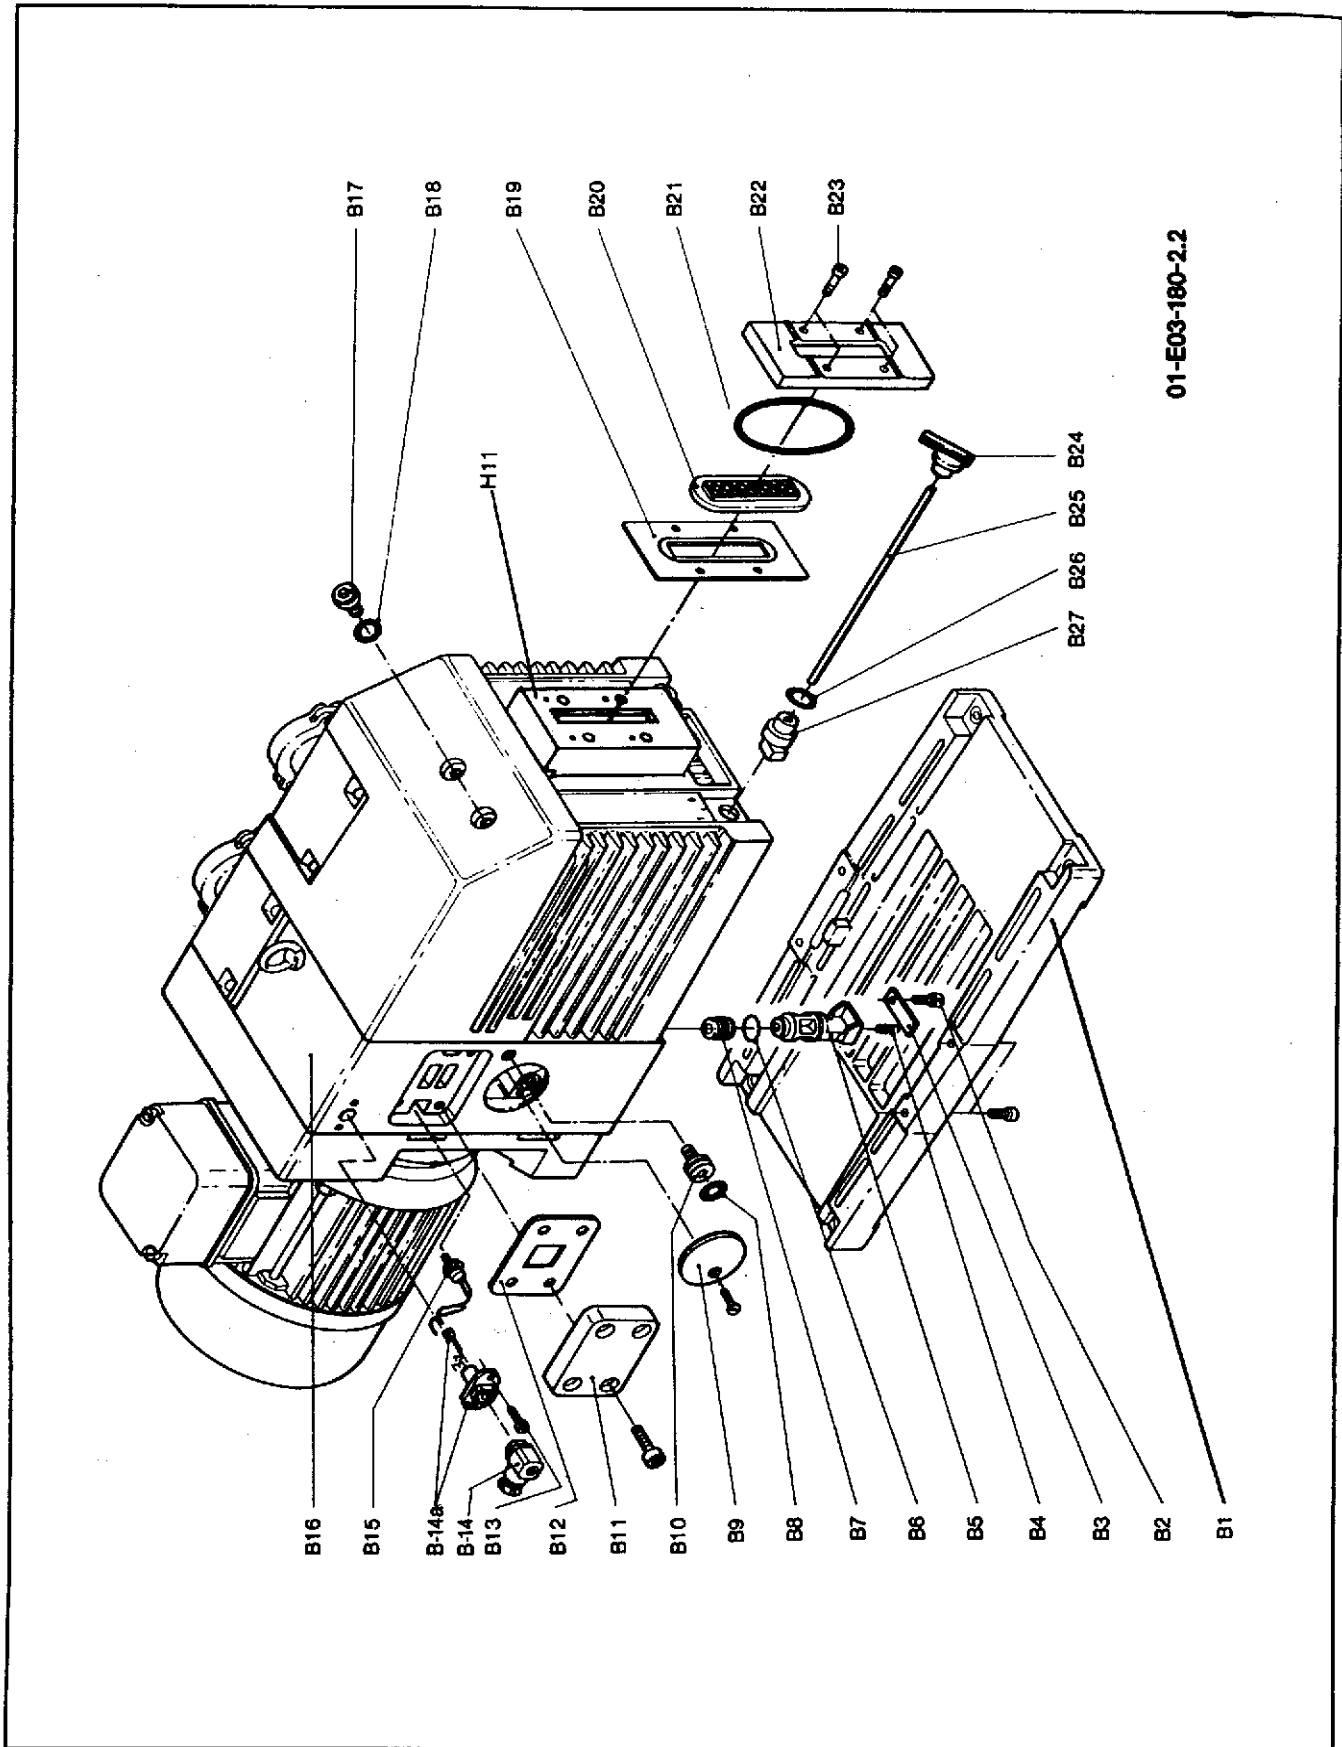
TRIVAC BCS System Pump, Exploded Level 2
